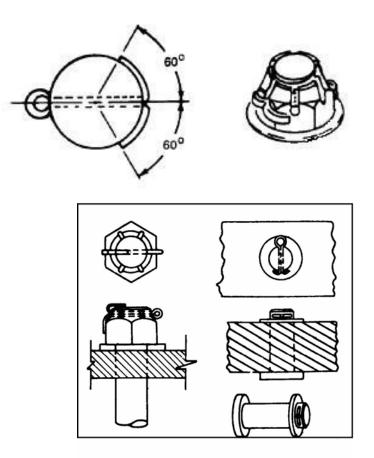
Securing bolts or castle nuts with a cotter pin.
